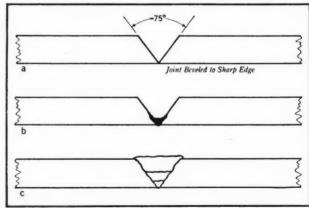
Joint preparation for oxy-acetylene welding. With proper preparation, no filler metal need be added for the first bead. Second and successive beads are applied from bottom to top, as seen at (C)
